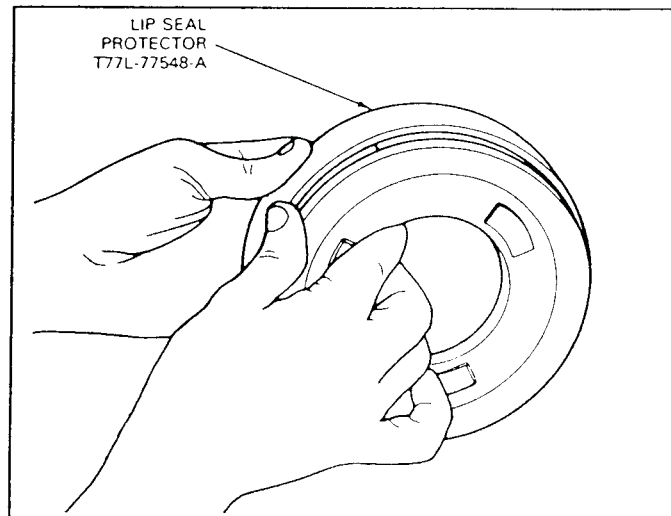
Installing Forward Clutch Piston and Lip Seal
